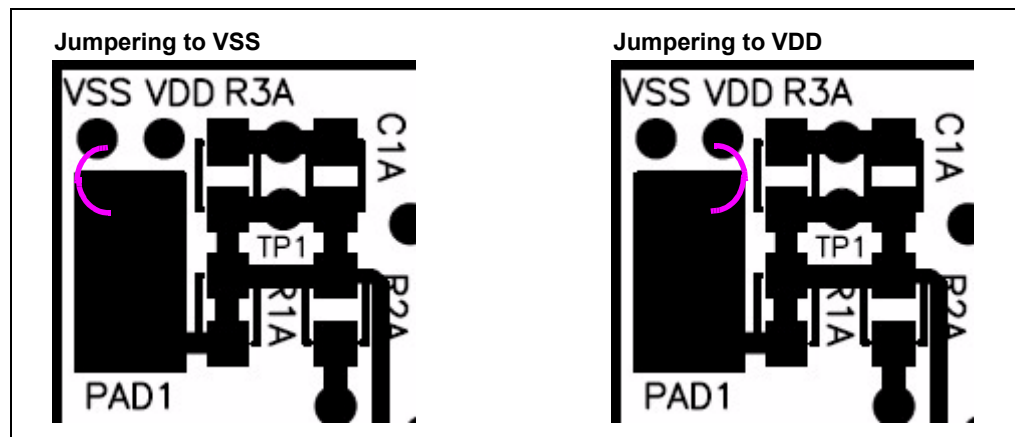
Jumping the PCB pad to either VDD or VSS.
